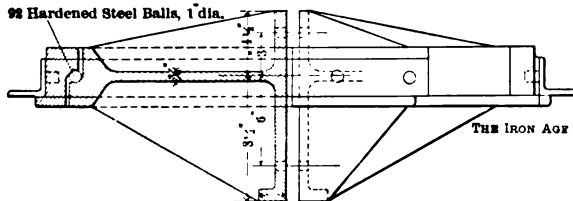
SECTION OF LOWER BALL BEARINGS.
